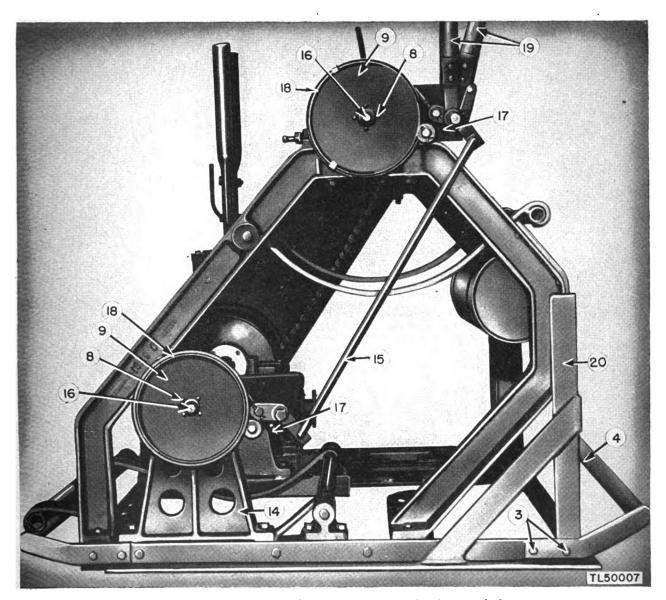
Reel Unit RL-26-A with reinforcing kit attached.
